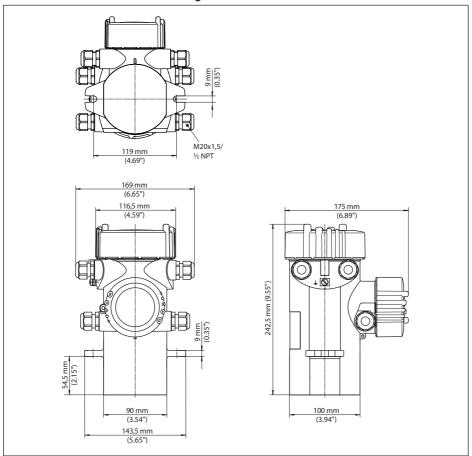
Aluminium housing or stainless steel housing - Precision casting
